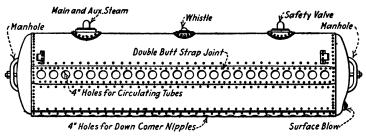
Rear View of Steam Drum B. & W. Boiler
